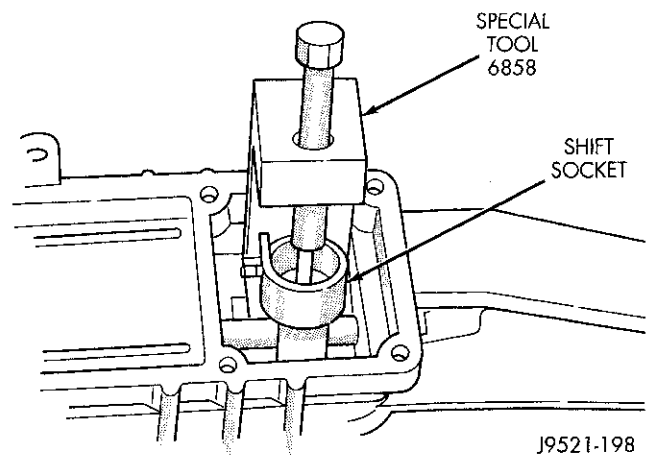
Unseating Shift Socket Roll Pin With Tool 6858
